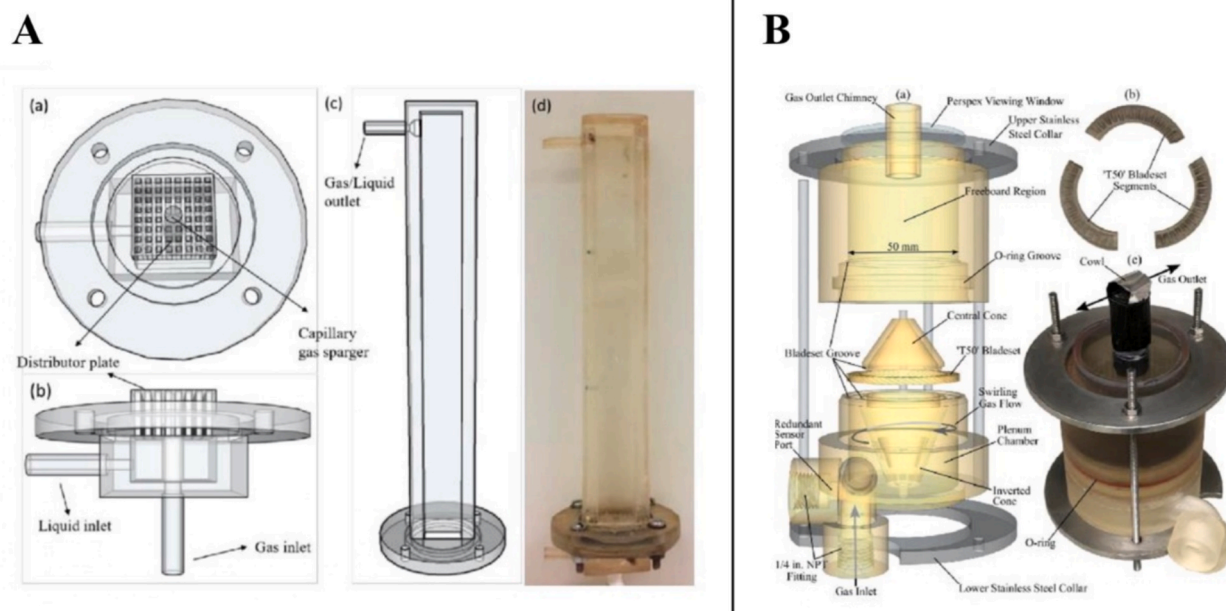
Design of 3D-printed MFBs. A) CAD model of the MFb: (a) top view of the lower section, (b) front view of lower section, (c) upper main column with and (d) image of the assembled 3D-printed MFb. Reprinted with permission from (Zhang et al., 2021a). B) (a) CAD model of the small-scale TORBED, (b) 3D-printed T50 blade segments, (c) fully assembled 3D-printed high temperature polymer prototype. Reprinted with permission from (McDonough et al., 2020).
